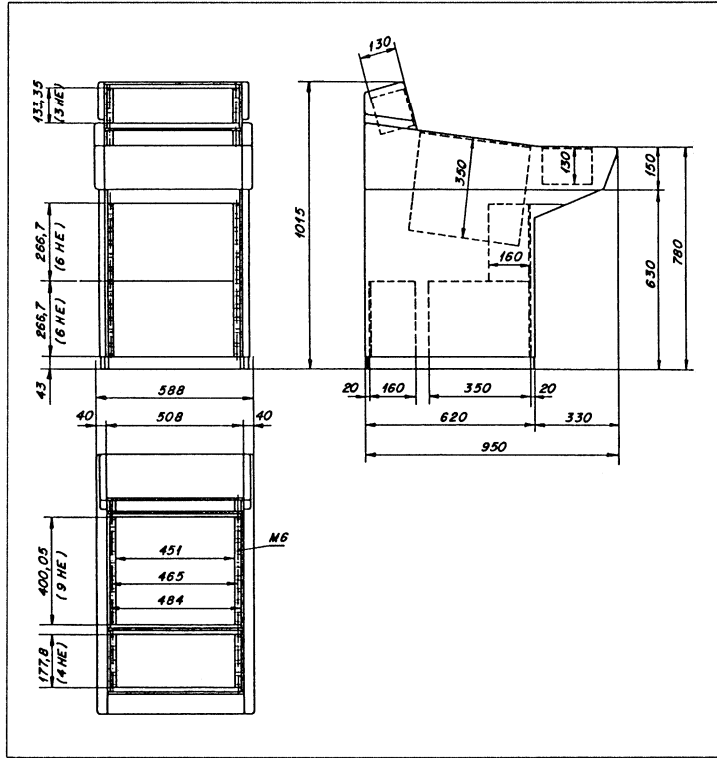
Dimension drawing of the two chassis widths for the two basic versions with 3 and 4 module sections respectively.
